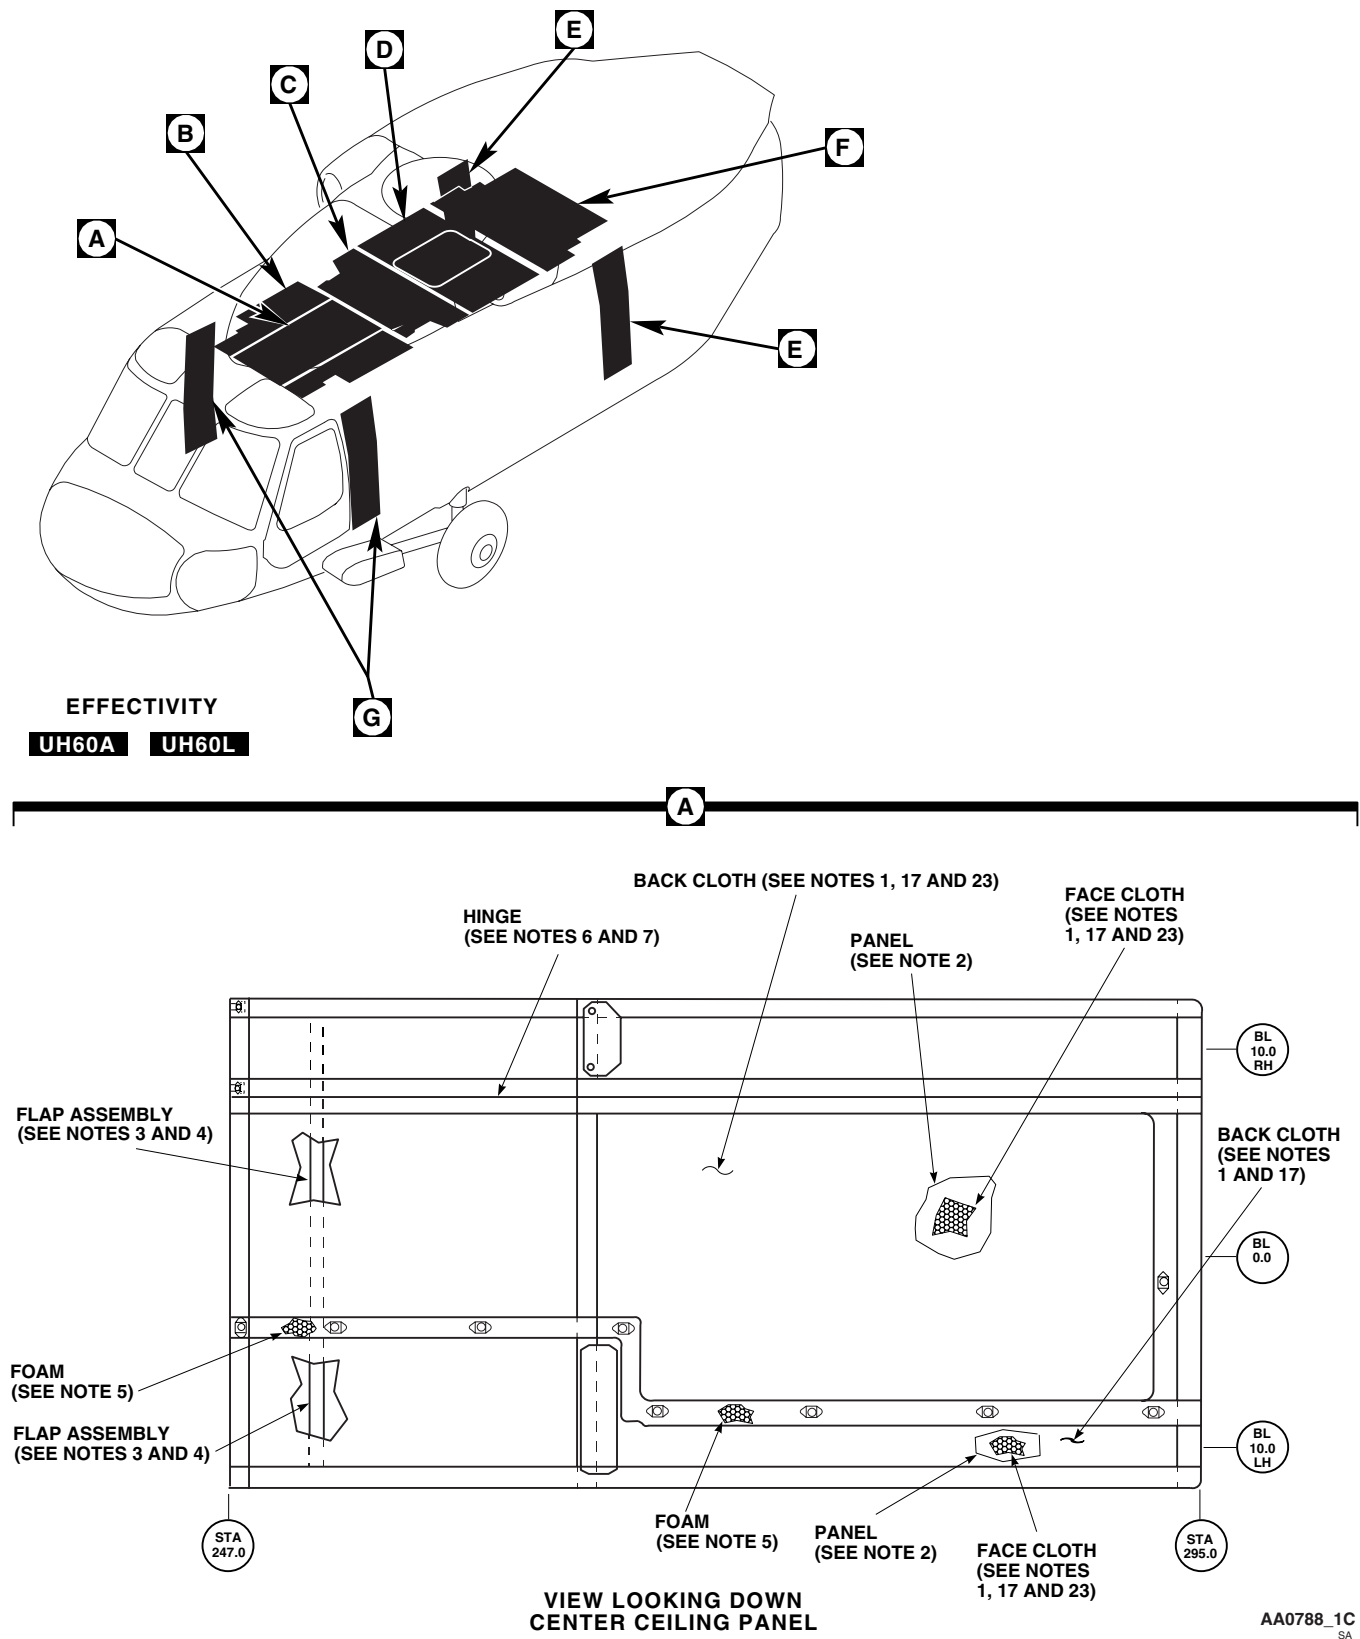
Soundproofing Panels (AVIM). (Sheet 1 of 13)
